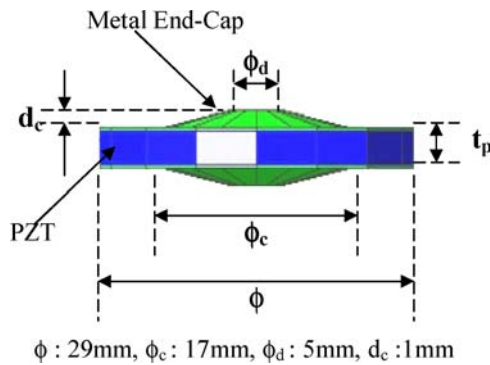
Dimensional details of the fabricated cymbal transducer.
